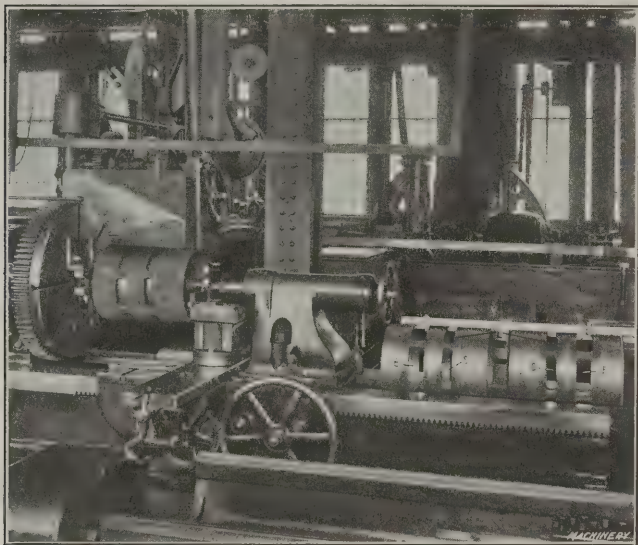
Method of Turning Valve Bushings and Preliminary Test to determine Location of Steam Ports
